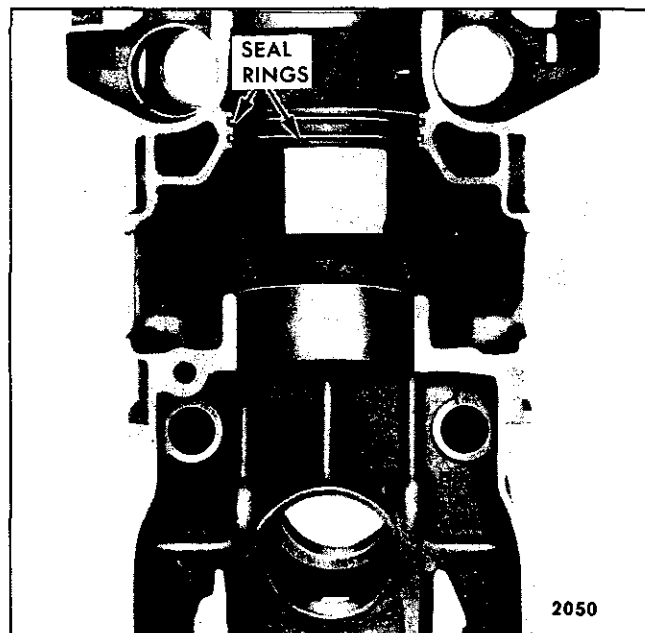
Cylinder Liner Seal Ring Location in Cylinder Block Bore
